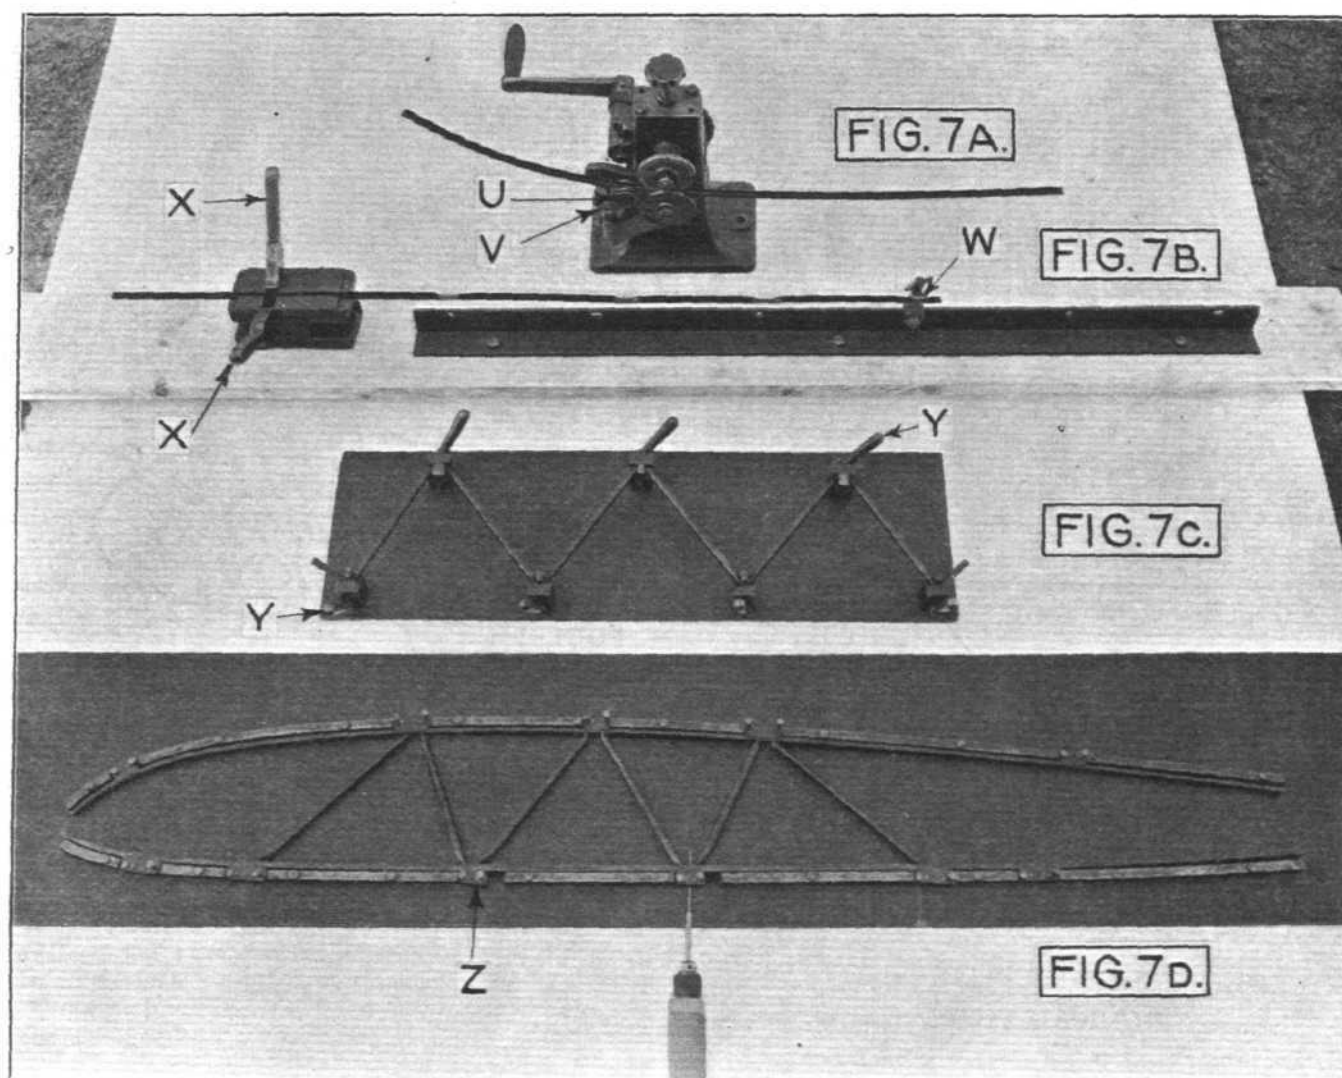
shows the method used for folding over the sides of the bracing channel. The end of the channel is held in the small clamp W and this clamp is held by a pin through a hole in the angle iron. This pin is inserted successively in the series of holes shown in the sides of the angle. After each "setting" the handles X are turned over, this action folds over the sides of the channel which lies in a groove between these handles.
